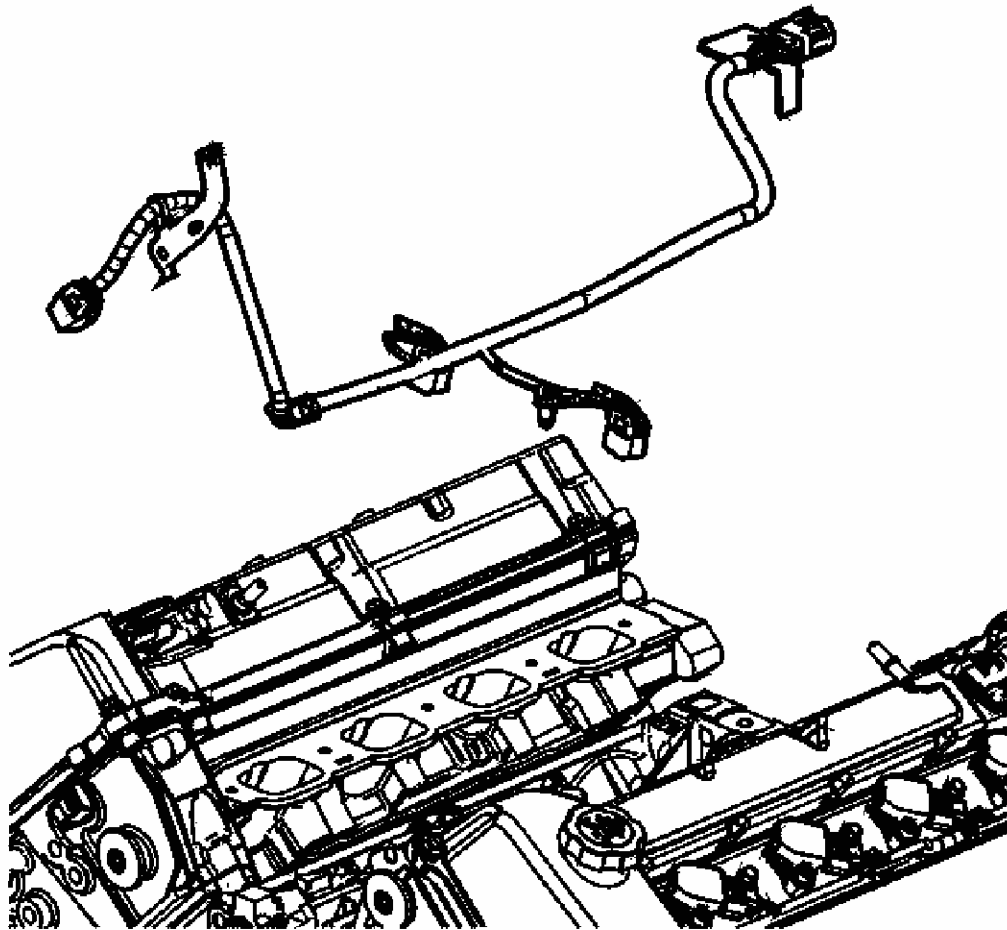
Identifying Crankshaft Position Sensor Wiring Harness
